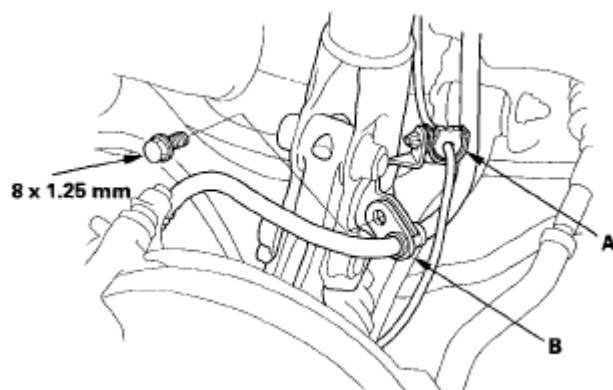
Identifying Wheel Sensor Harness Clip And Brake Hose Bracket
